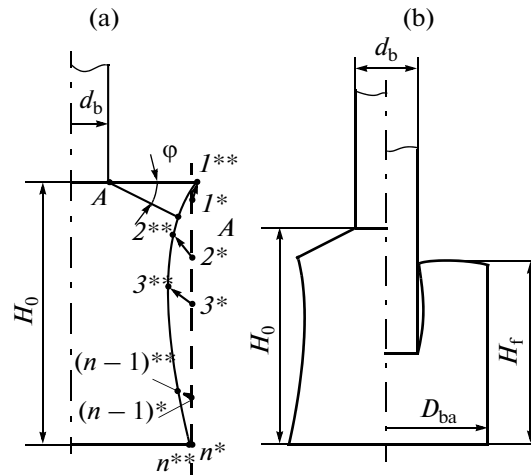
Design of the generatrix of a complex workpiece (a) and contours of the designed workpiece (b).
